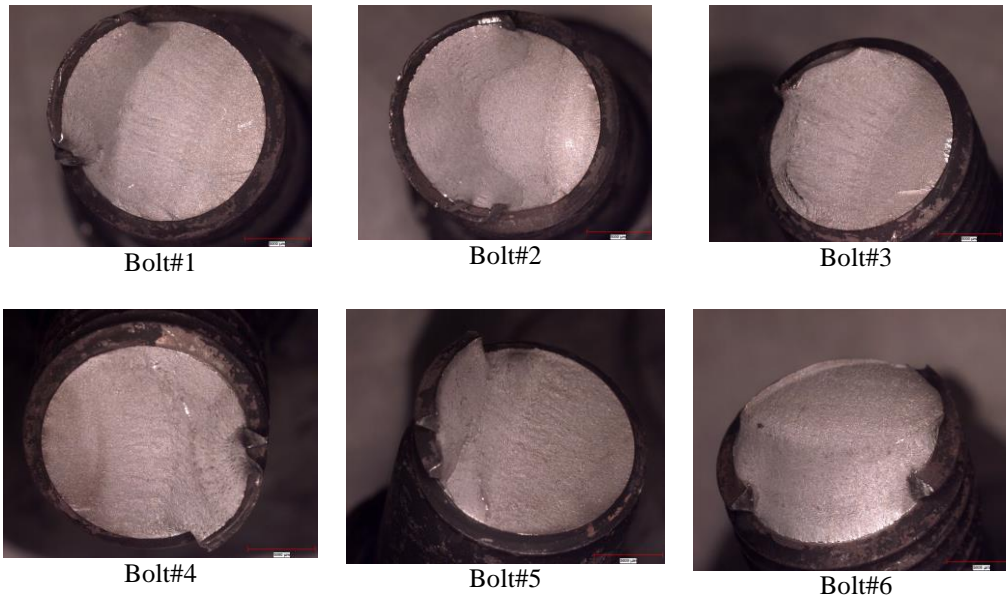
Macroscopic aspects of fracture surfaces, 6.7X
